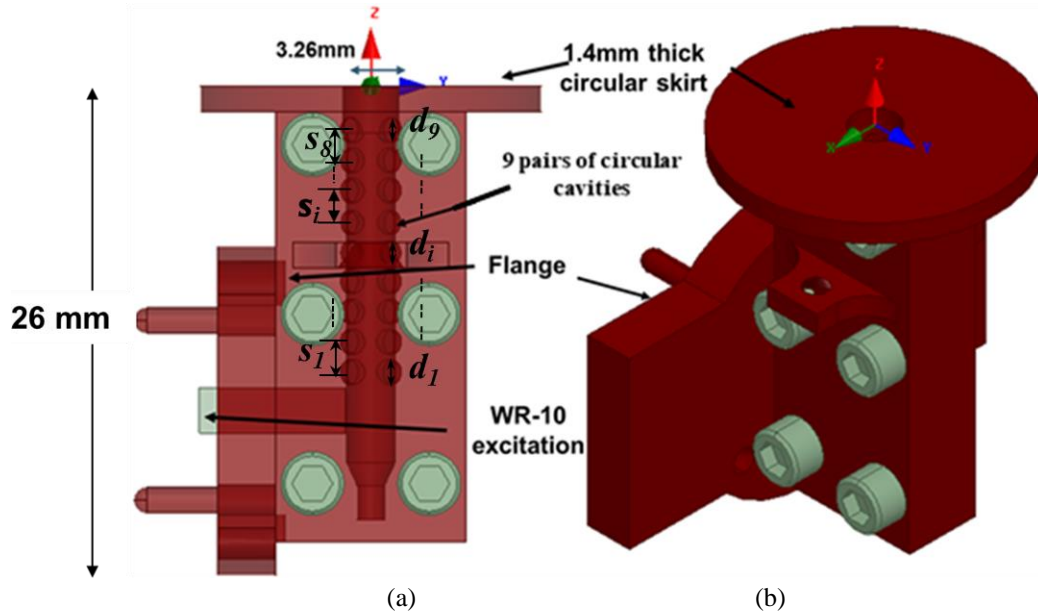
Final optimized modified design with circular skirt (a) front view and (b) isometric view.
